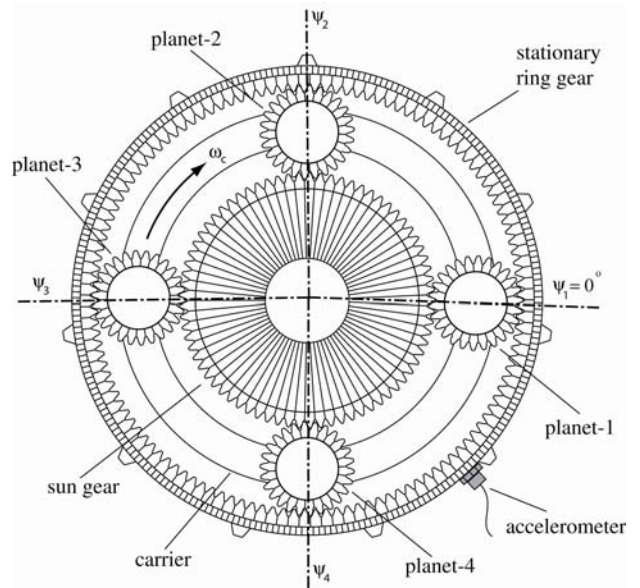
A planetary gear set with four planets and a sensor mounted on the stationary ring gear.
